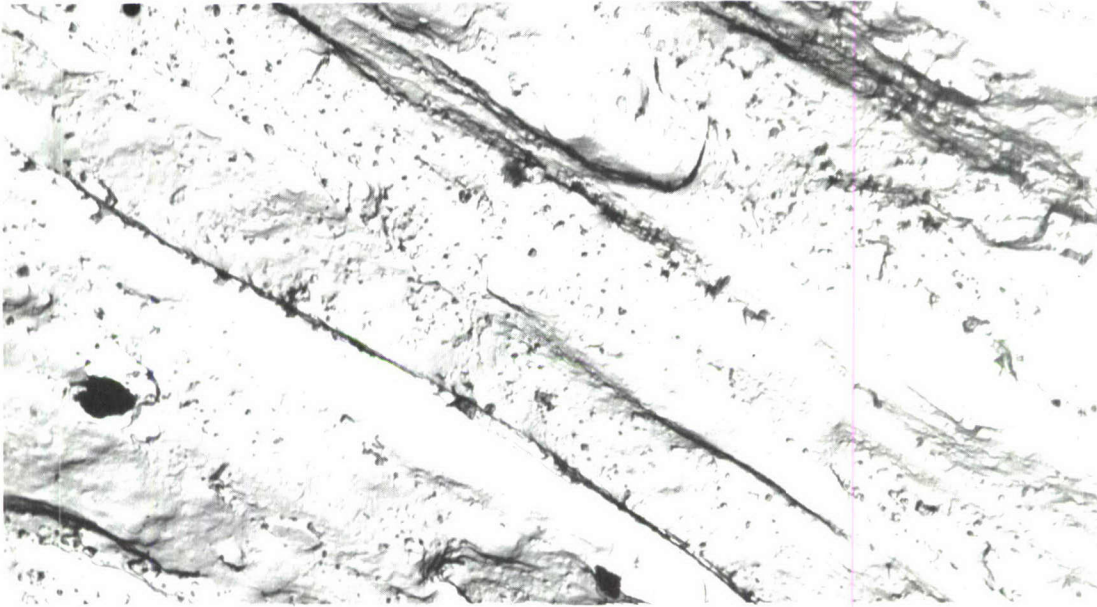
STEREOSCOPIC ELECTRON MICROFRACTOGRAPH OF FATIGUE FRACTURED SURFACE
